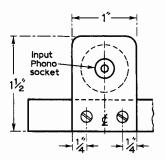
(above left) Output socket assembly. Fig. 3b: (above) Input socket assembly.
